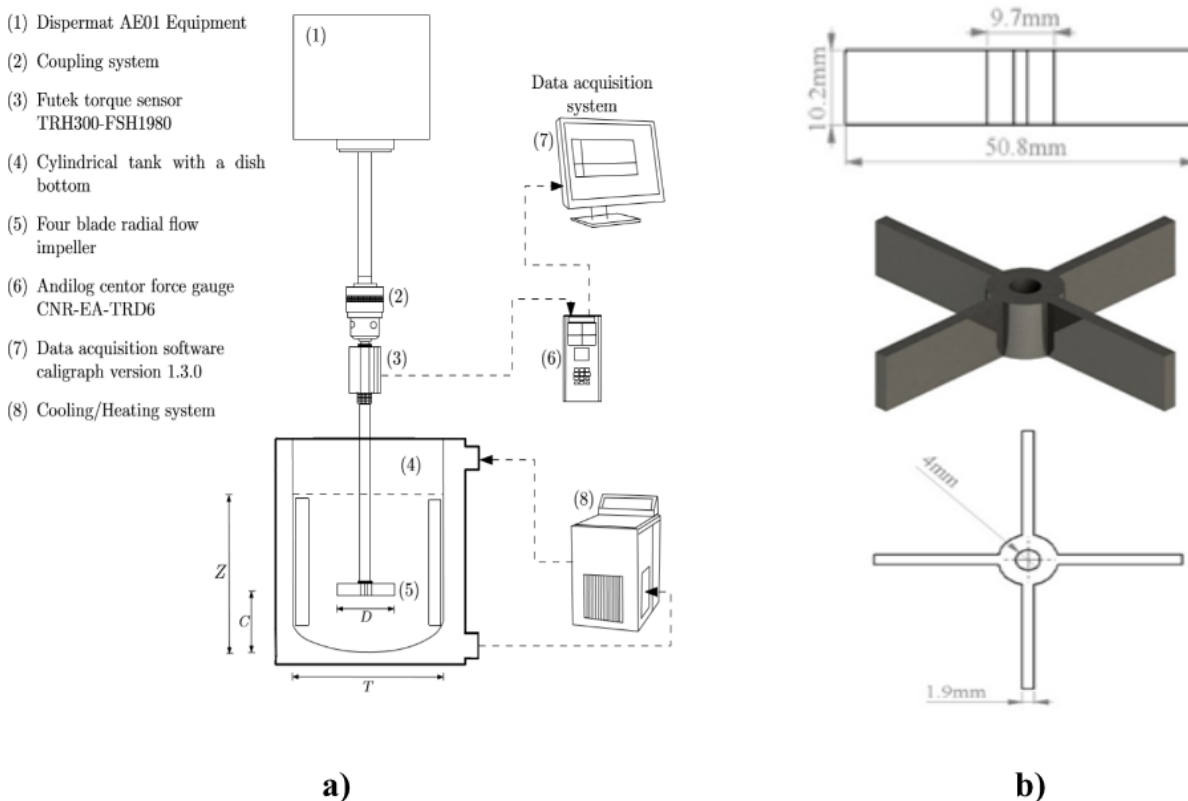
a) Experimental setup, b) Scale drawing of the studied impeller.
